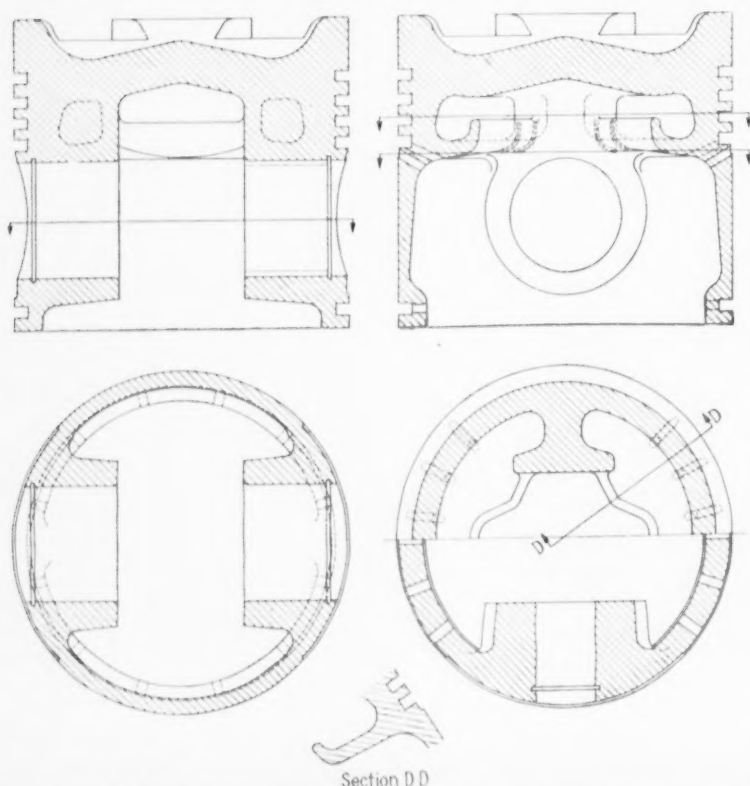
A 7 in diameter, Ricardo Cocktail Shaker type oil cooled piston.
